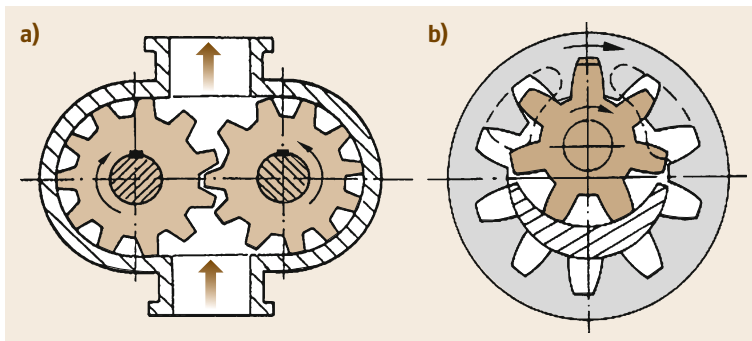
,b Single-rotation piston design. (a) External gear, (b) internal gear
